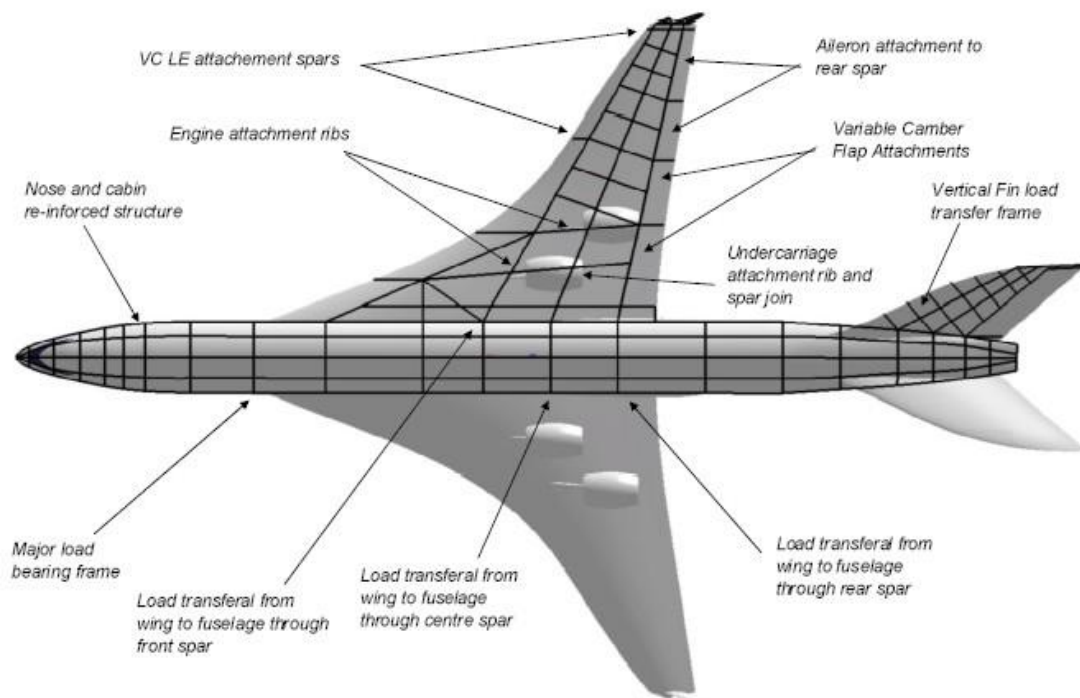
BDSF plan view layout of major structural components and critical attachment areas
